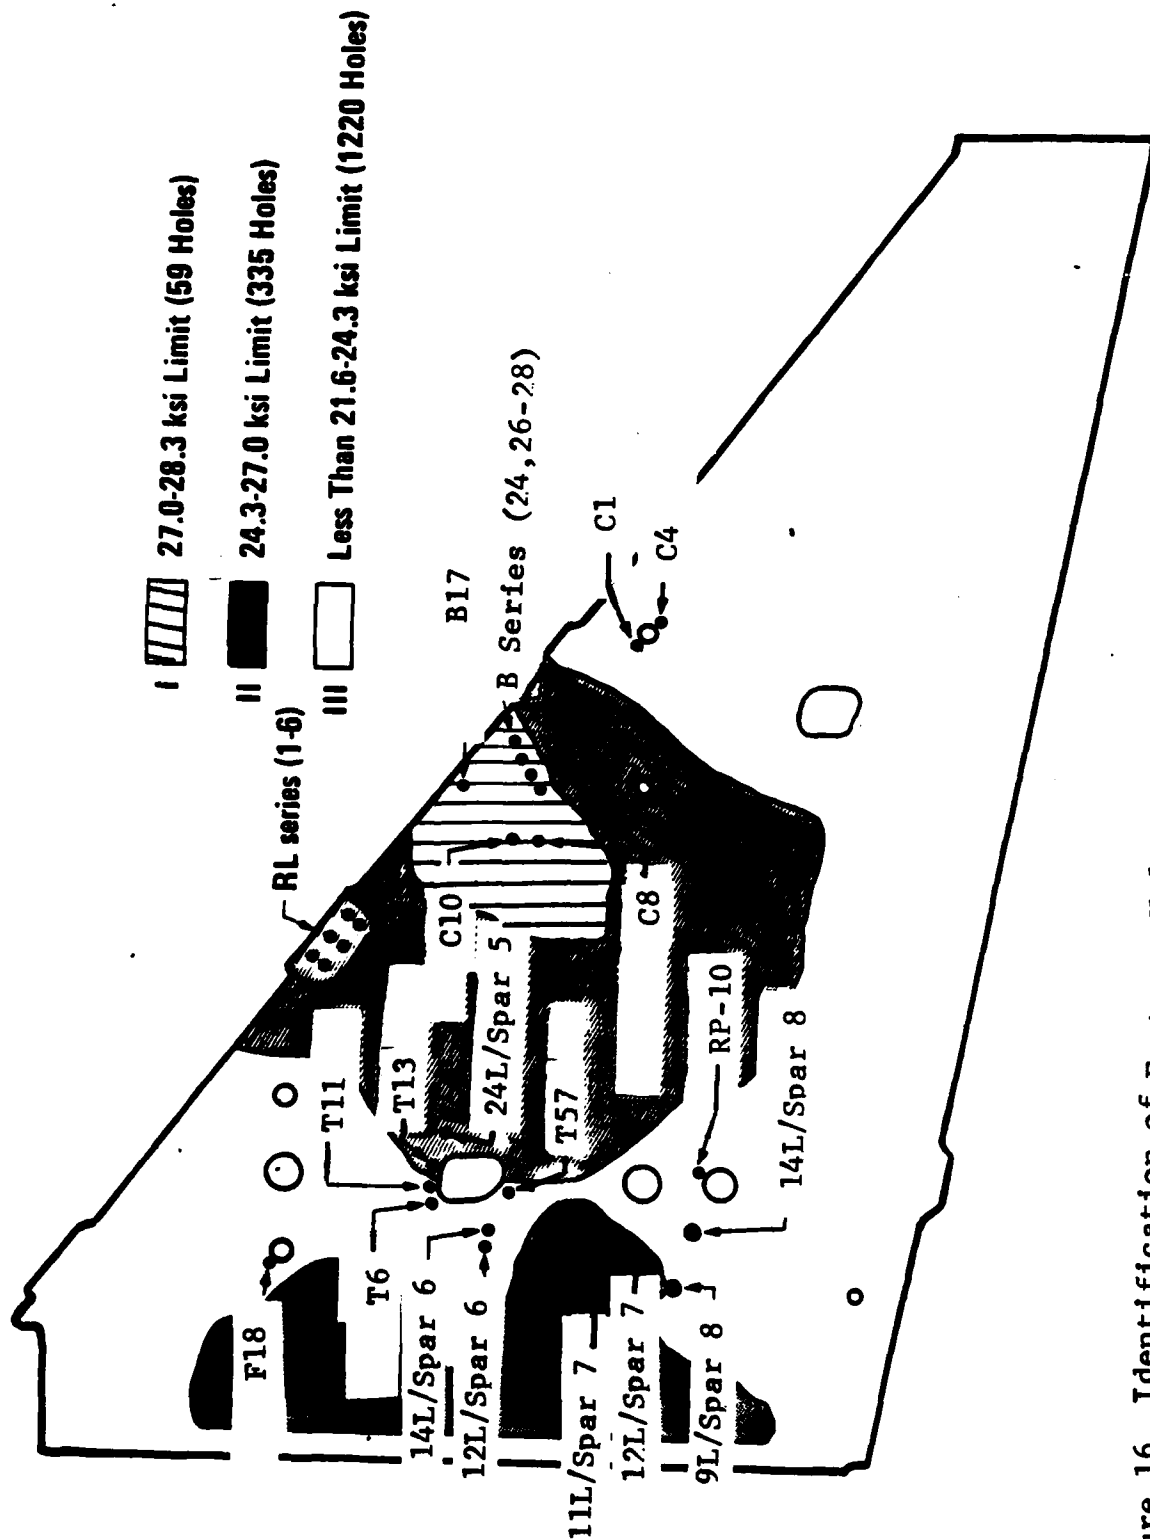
Identification of Fastener Holes In The F-16 Durability Component Lower Right Hand Wing Skin With Observed Cracks (After 16000 Hrs. of Testing With F-16 500 Hr. Spectrum)
